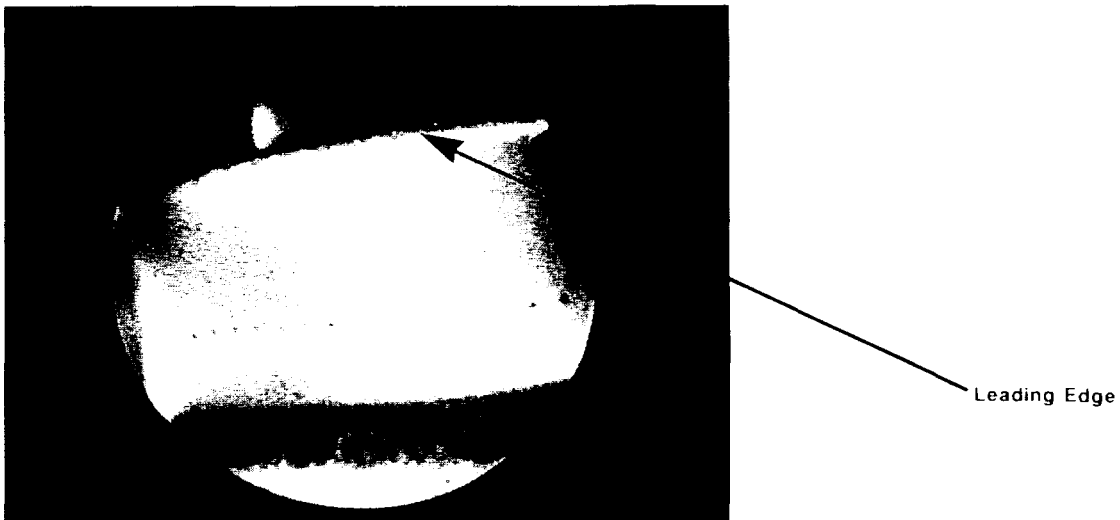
HP1 TURBINE ROTOR BLADE AFTER 1030 HOURS
